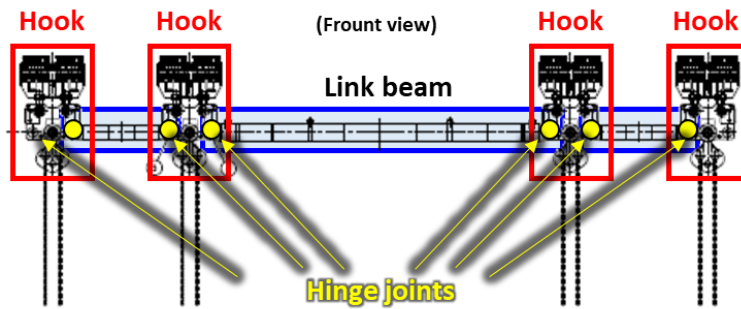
Front view of hooks, link beams, and hinge joints.
